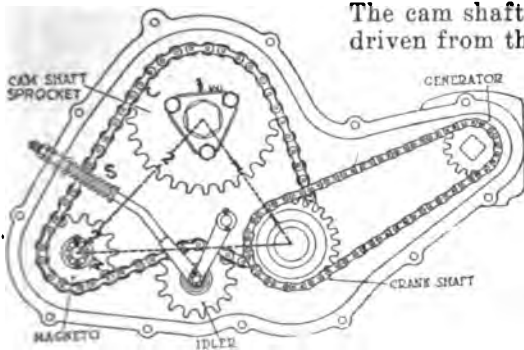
Note on the Overland model 75, sprockets and silent chains are used instead of gears.
